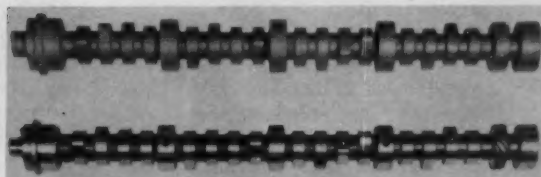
Shell-molded automotive camshaft notable for less scrap than conventional castings, shown here before and after machining.
